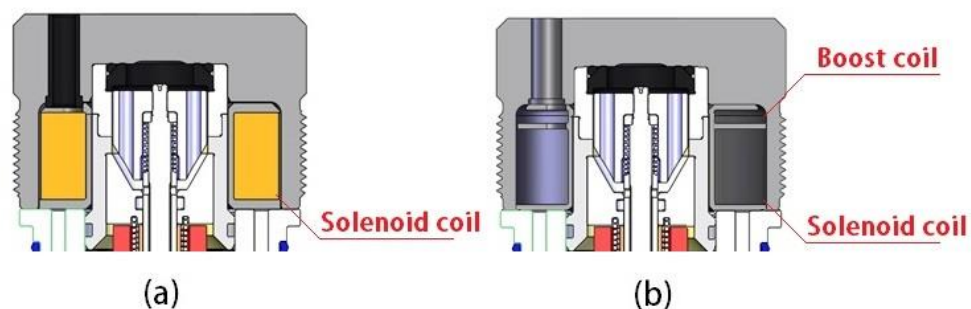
Frontal cut of the MAV8 valve: a) single coil design, b) double coil design.
